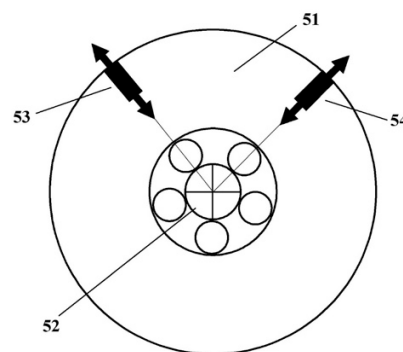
Generation of rotor unbalance (application example): 51 rotor disc, 52 rotor bearing, 53 and 54 unbalance actuators, fixed at the rotor.
